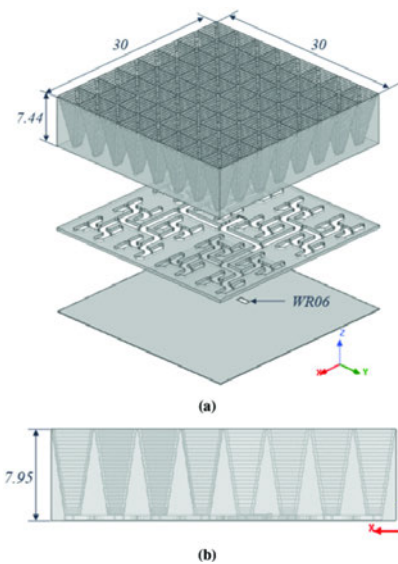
(a) Exploded 3D view and (b) cross-sectional view of the 8×8 slotted antenna array in [26].
